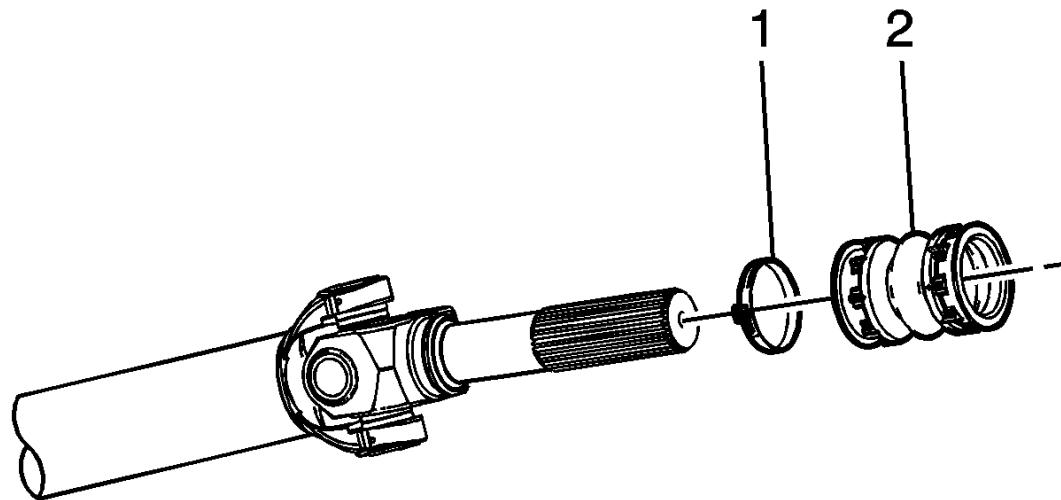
Propeller Shaft, Clamp And Shaft Boot
